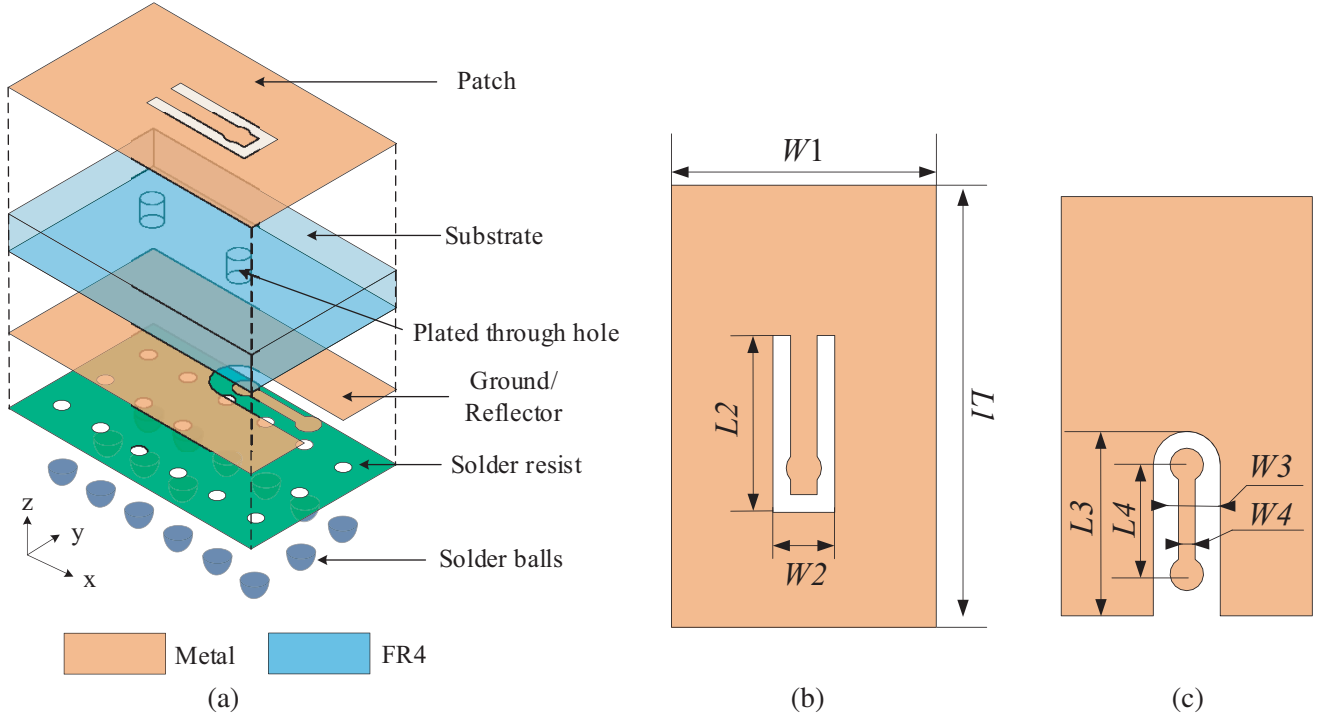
Geometry of the proposed antenna element. (a) Exploded view. (b) Top view. (c) Bottom view.
